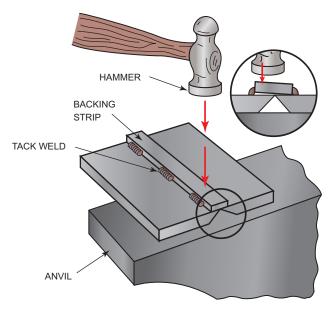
A hammer can be used to bend metal into alignment after a tack weld has been made.
